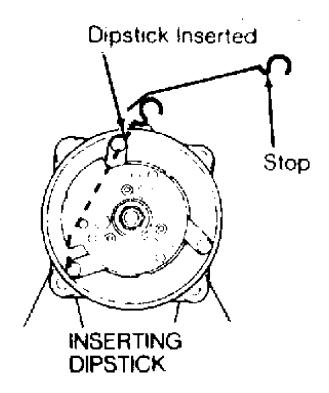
Sanden 5-Cylinder Oil Level Checking Courtesy of Sanden International U.S.A, Inc.
